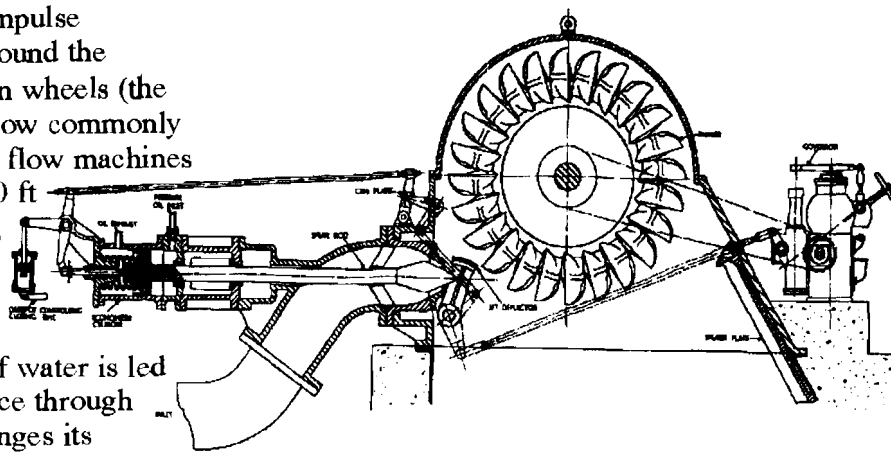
SECTIONAL DRAWING OF A TYPICAL SINGLE-JET PELTON WHEEL.
